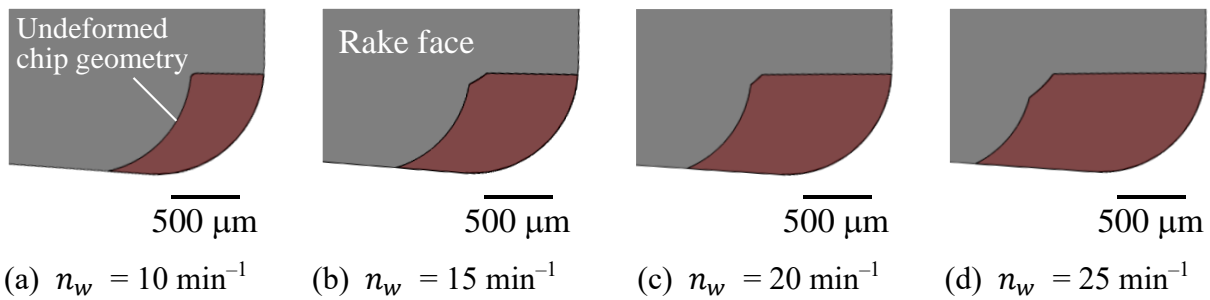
Relationship between workpiece revolution speed and undeformed chip geometry in maximum cross-sectional cutting area.
